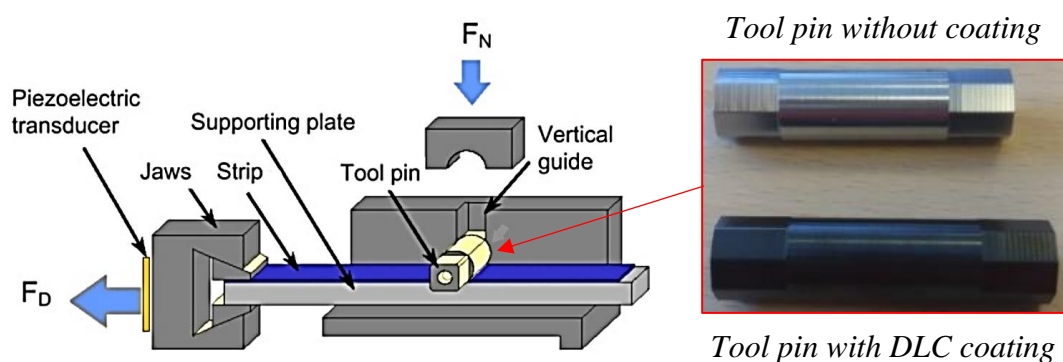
Strip reduction emulating ironing (left) [36], and the tool pins with and without the DLC coating (right). Technical drawing for tool pin holder and tool pin are shown in Appendix G.
